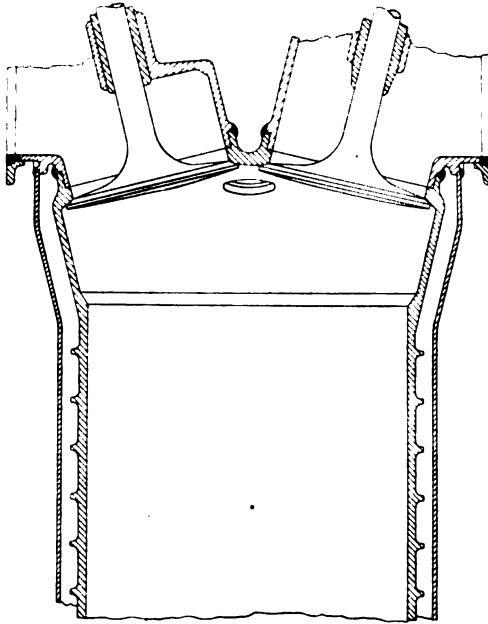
Detail of water space over combustion head, Liberty engine, showing position of outlet and provision for cooling of exhaust-valve sleeve.
